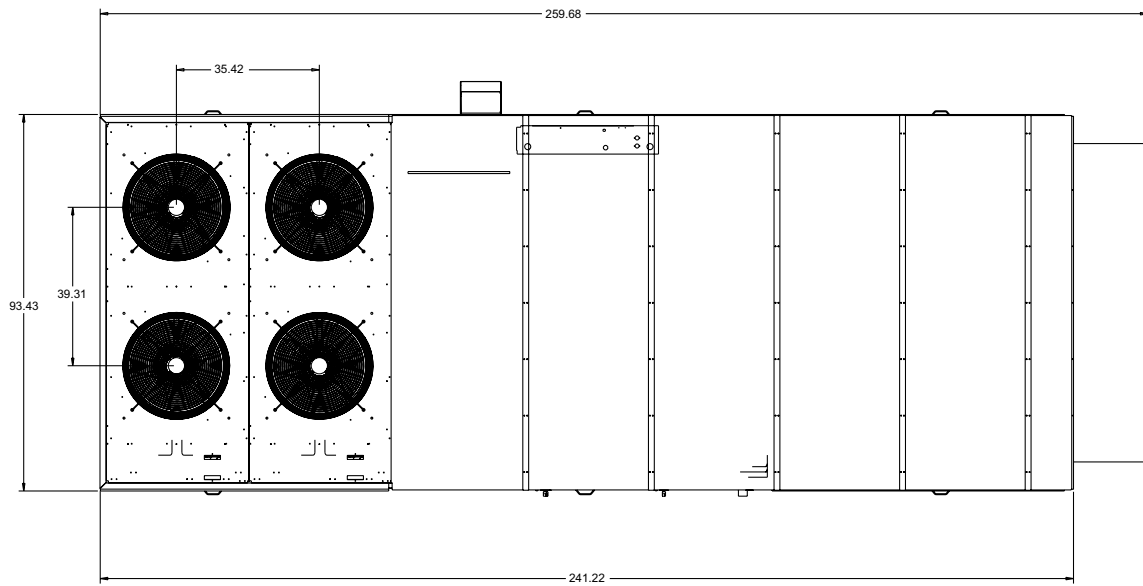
MILLENNIUM OVERHEAD VIEW
